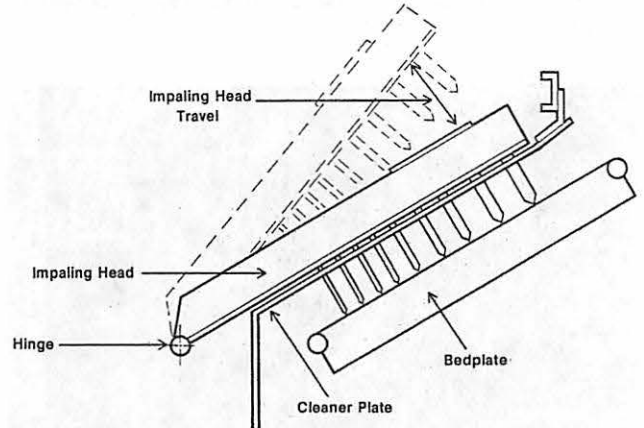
Section View of Impaling Head, Bedplate and Cleaner Plate.
